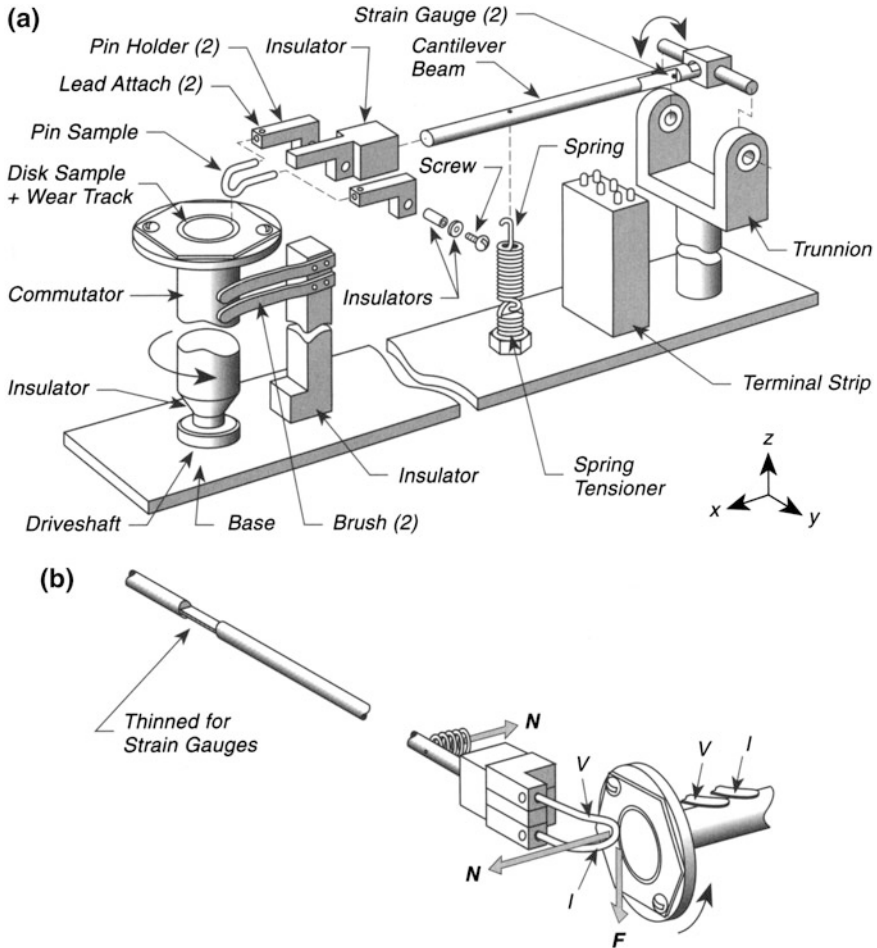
Pin-on-disk measurements—UHV. a Exploded view. b Forces and electrical contacts
